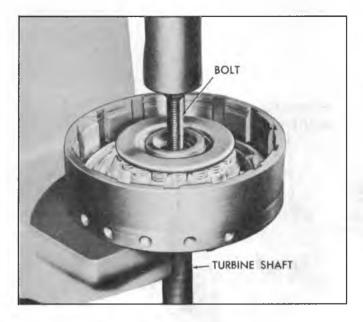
T--Removing Turbine Shaft from Forward Clutch Housing
